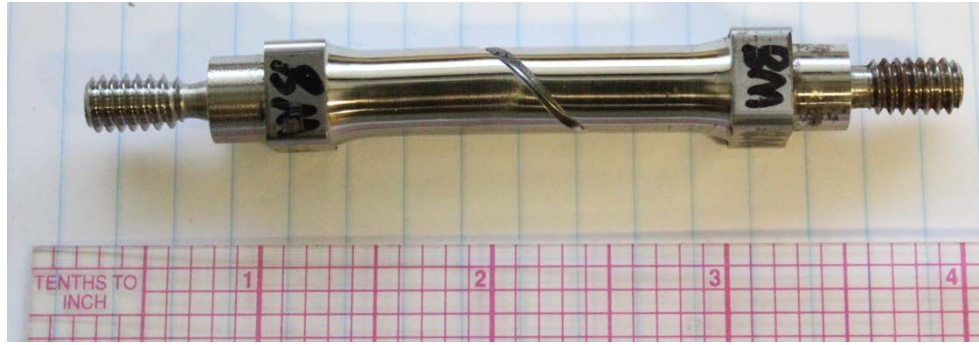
The fatigue precracked SNTT welded material sample W8.
